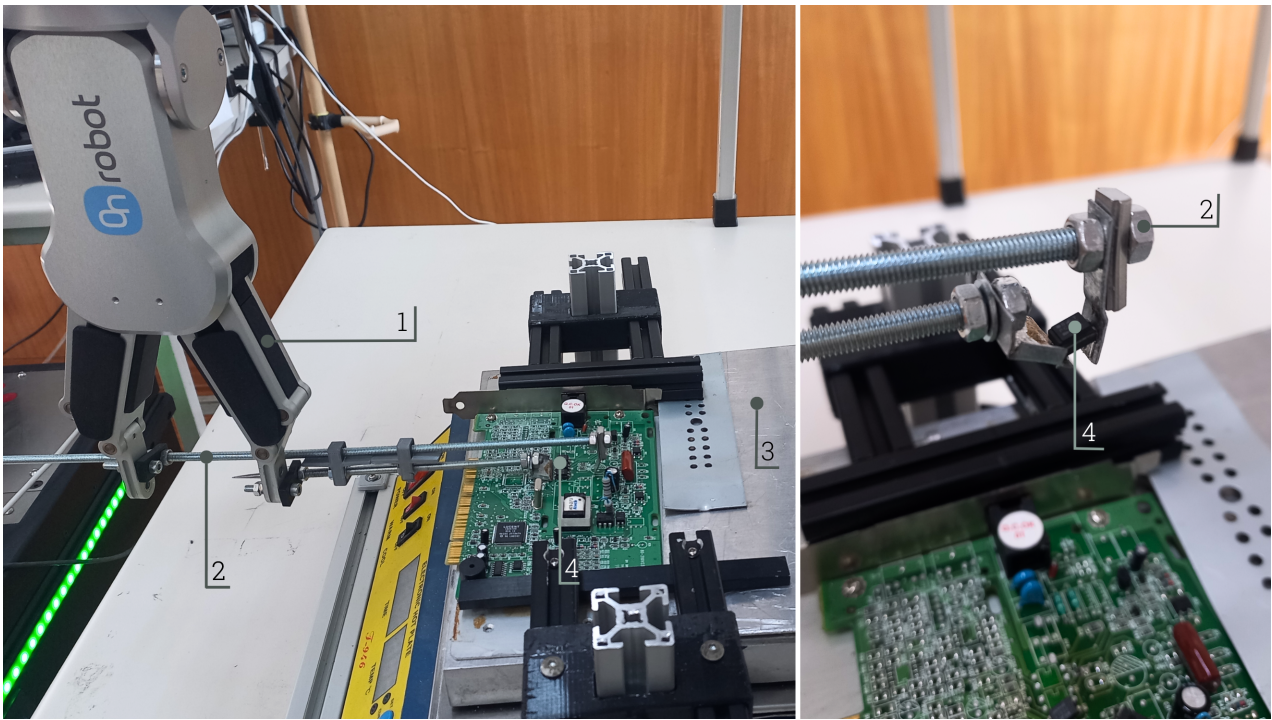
Experimental setup for the tests with larger PCBs (Level 2). (1) gripper, (2) tool, (3) hot plate, and (4) PCB' component.
